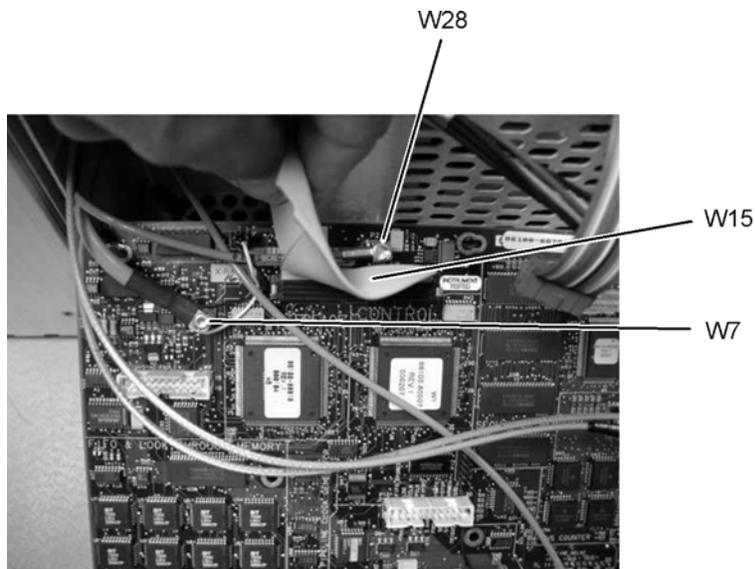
W28, W7, and W15 Cables from the A13 Acquisition Board
